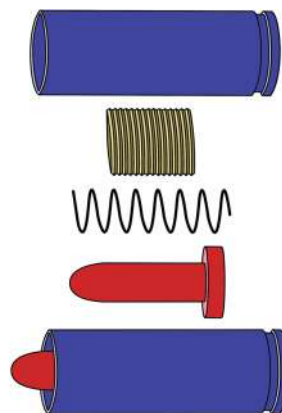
Plunger mechanism (patrix) of the attachment (top three diagrams) that will be incorporated into the removable partial denture framework. The assembled mechanism is shown at the bottom.
